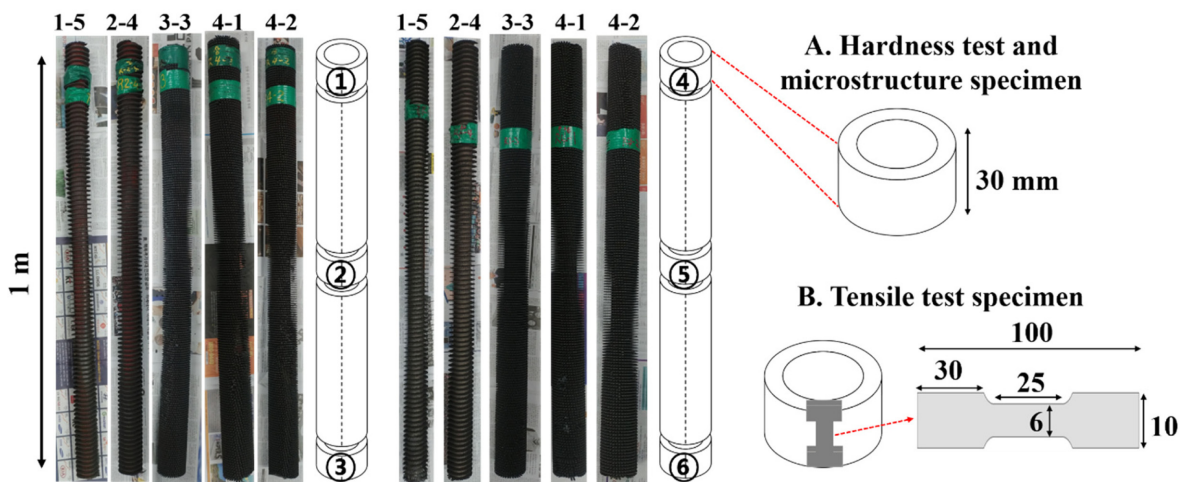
Deteriorated high-pressure superheater tube samples; specimen geometry (a) for hardness and microstructural investigation and (b) for the tensile test
